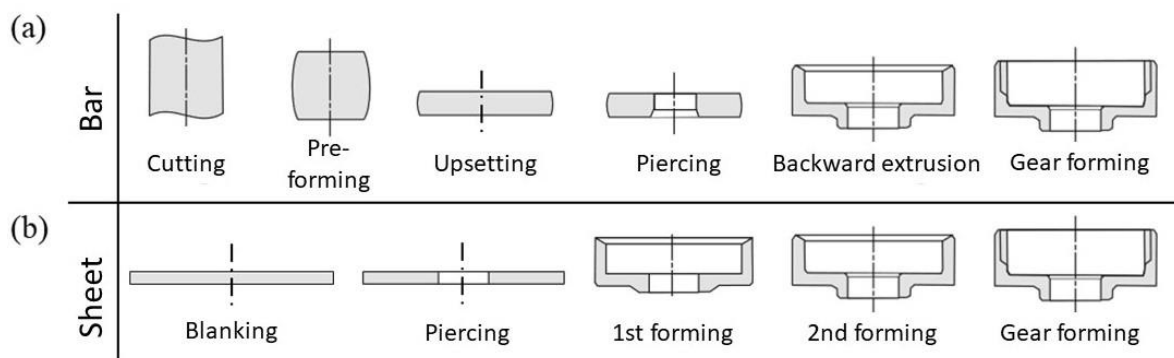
The difference between conventional billet forging and plate forging (Modified from [NAK09])
